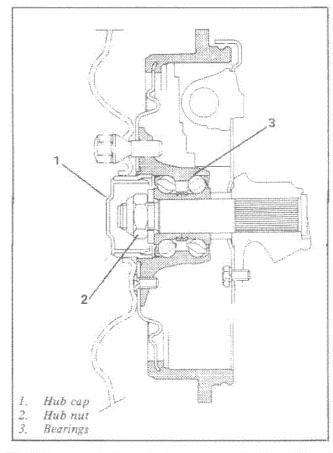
Sectional view of later hub assembly (May 83 -on)
